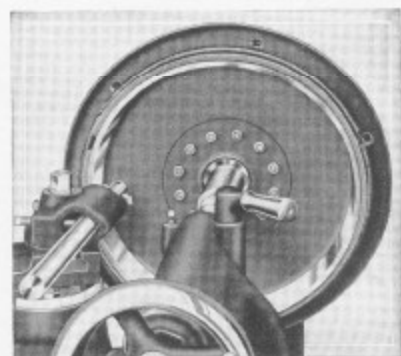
A Lincoln Car Brake Drum Being Trued by Turning in the Lathe.
